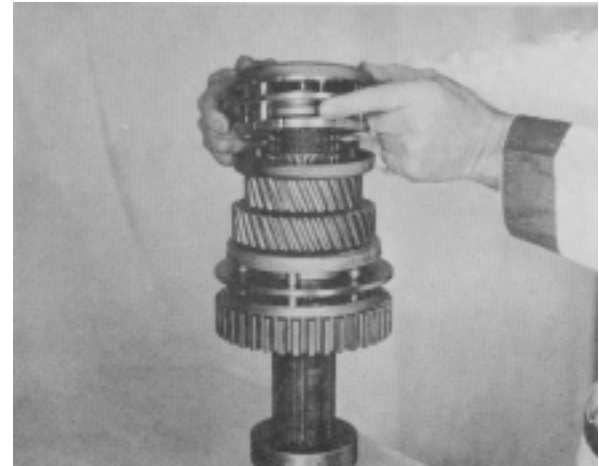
Remove mainshaft 1st & reverse sliding gear. Set mainshaft up as shown and remove 4th & 5th synchronizer assembly. NOTE: Bottom synchronizer cup may stay on mainshaft.
